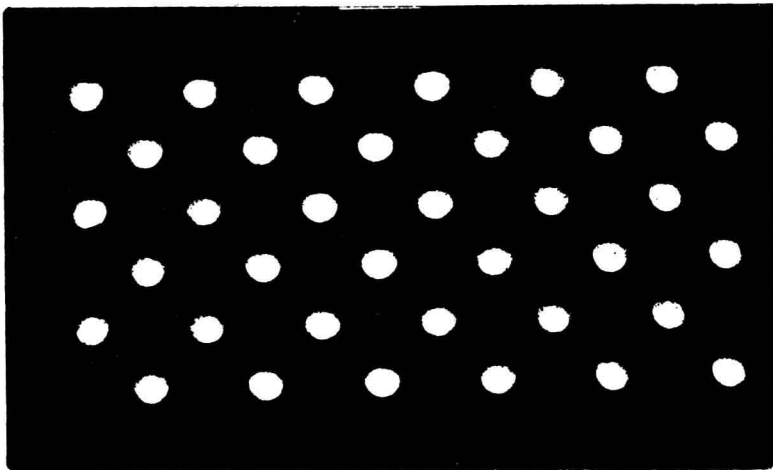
PERFORATION PATTERN PRODUCED BY TEST TOOL USED IN PRESS FOR THESE TESTS.
